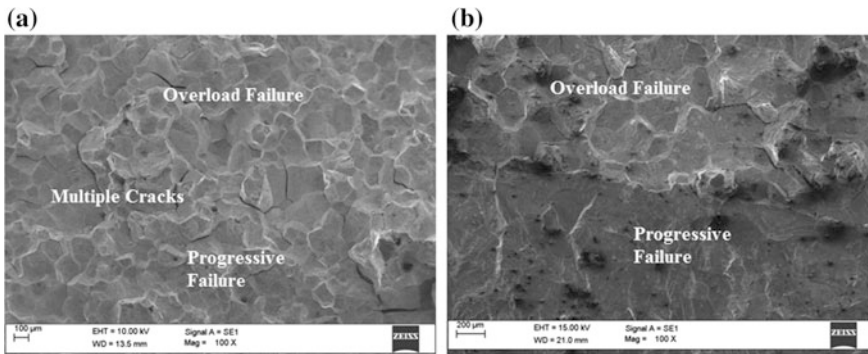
SEM fractograph showing cracks in turbine blades manufactured by different machining processes a ECM showing multiple cracks and b CNC milling showing only one crack
